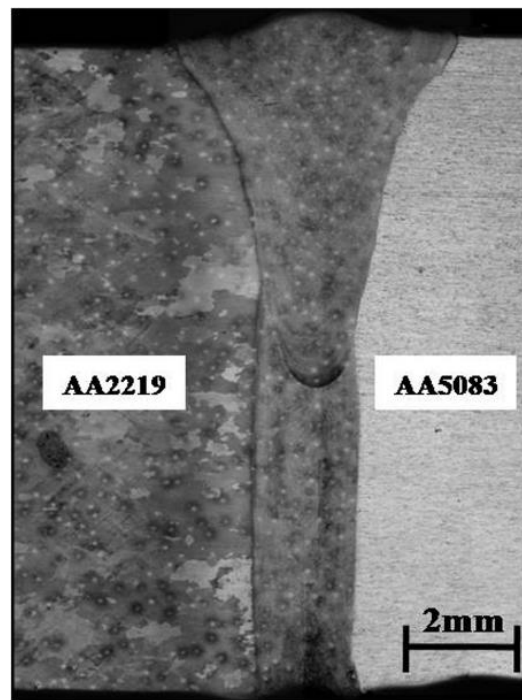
Macrostructure of representative AA 2219-AA 5083 EB weld joint.
